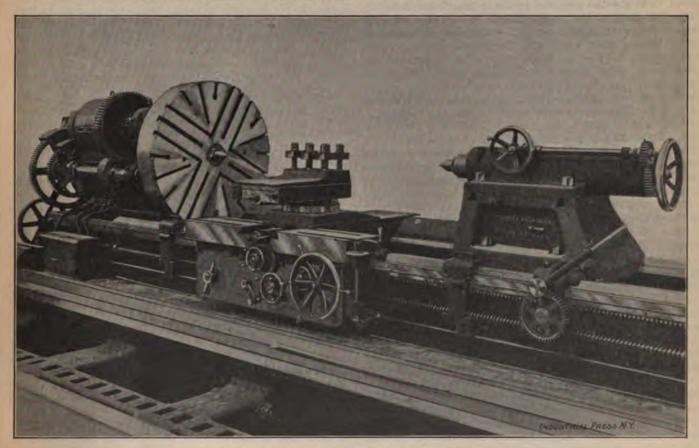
General View of one of the Sixty-inch Fitobburg Lathes.
